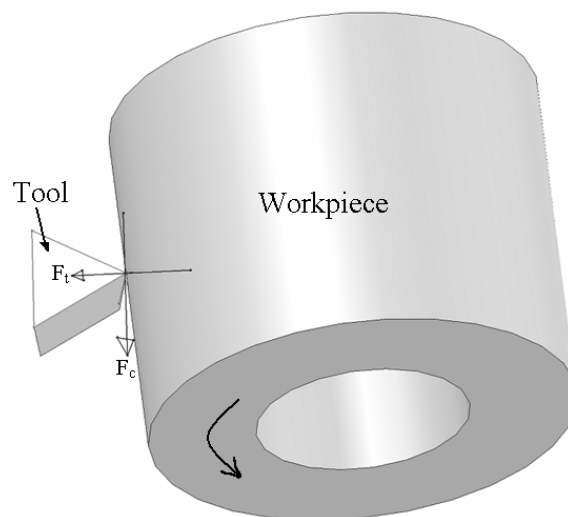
Schematic of Tool and Workpiece showing Cutting Force (F_c) and Thrust Force (F_t)
